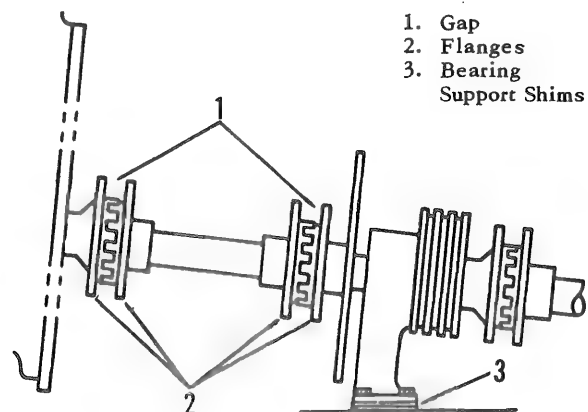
Alignment of Sections I and II of Tail Rotor Drive Shaft
